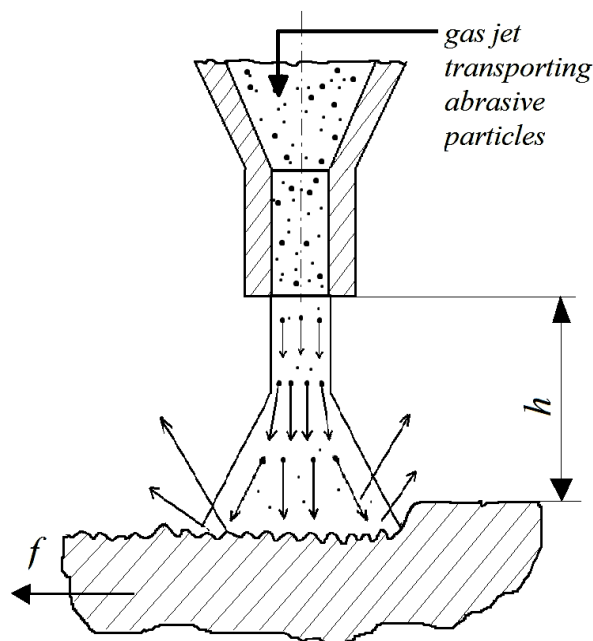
Impact of the abrasive particles with the workpiece surface
